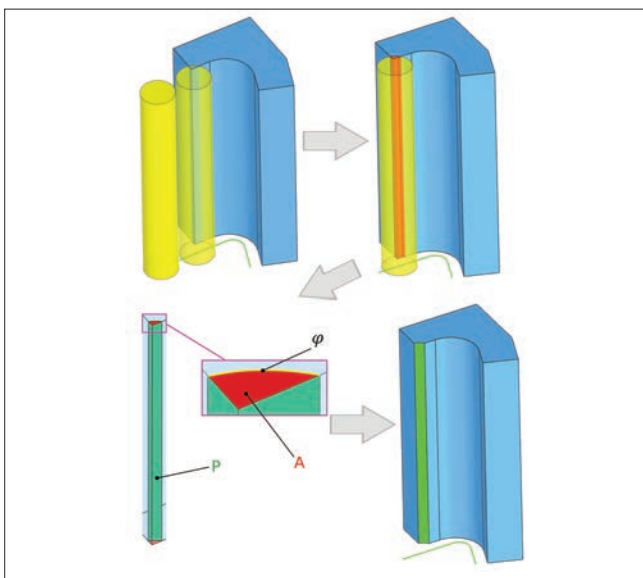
Scheme of simulation tests with measurement of wrap angle –  $\varphi$ , cross-sectional area of the machined layer –  $A$  and contact area of the tool with the workpiece –  $P$
